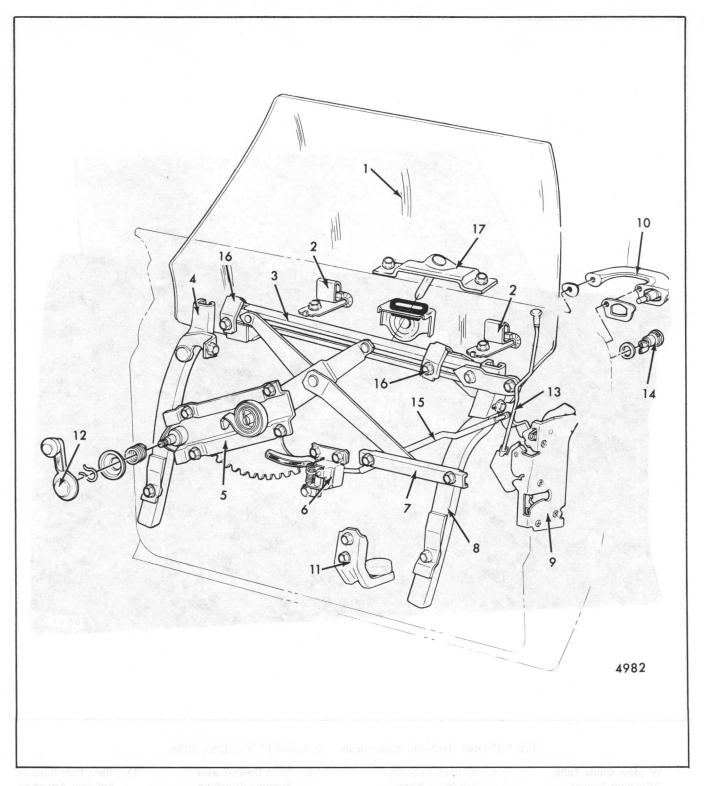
Front Door Hardware - "B and C-39 and 49" Styles and "C-69" Styles
